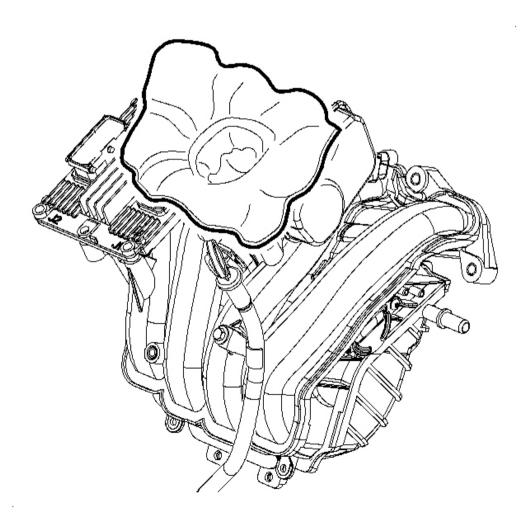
View Of Throttle Body Opening With A Shop Towel Courtesy of GENERAL MOTORS CORP.
